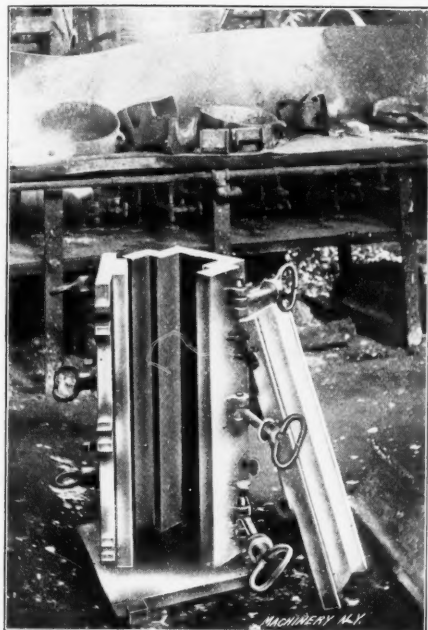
Mold for Babbitting Two-bar Guide Cross-head Gibs
